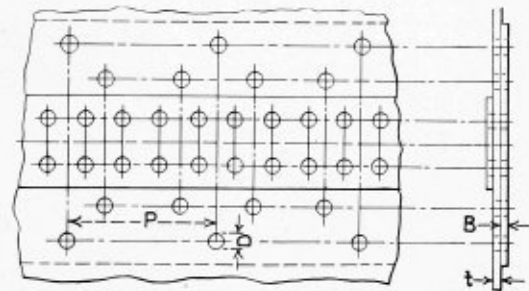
Triple-riveted butt joint with inside and outside welts
